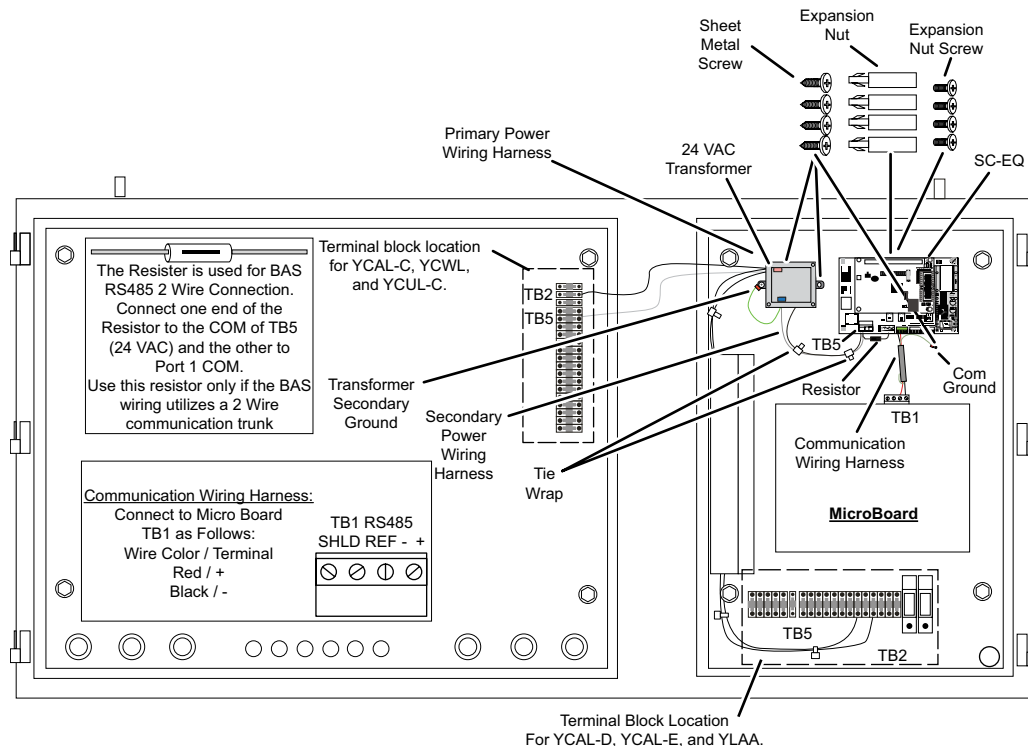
SC-EQ SCREW CHILLER INSTALLATION KIT PART NUMBER 392-41228-000
